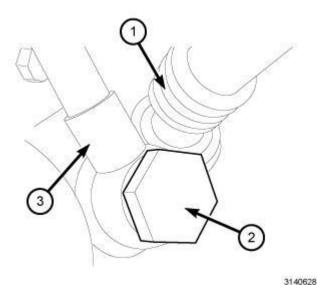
Upper Banjo Bolt & Turbocharger Supply Lines Courtesy of CHRYSLER GROUP, LLC
